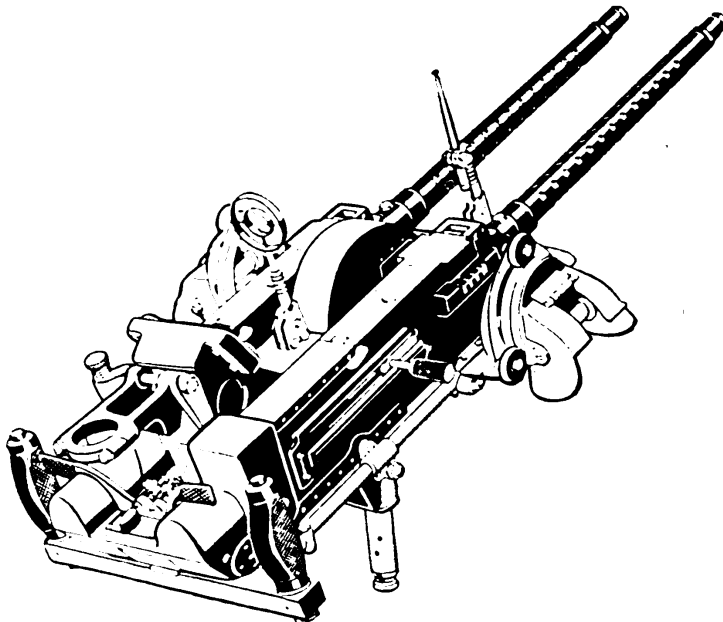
Gun mount adapter carrying two caliber .30 BAM guns.
